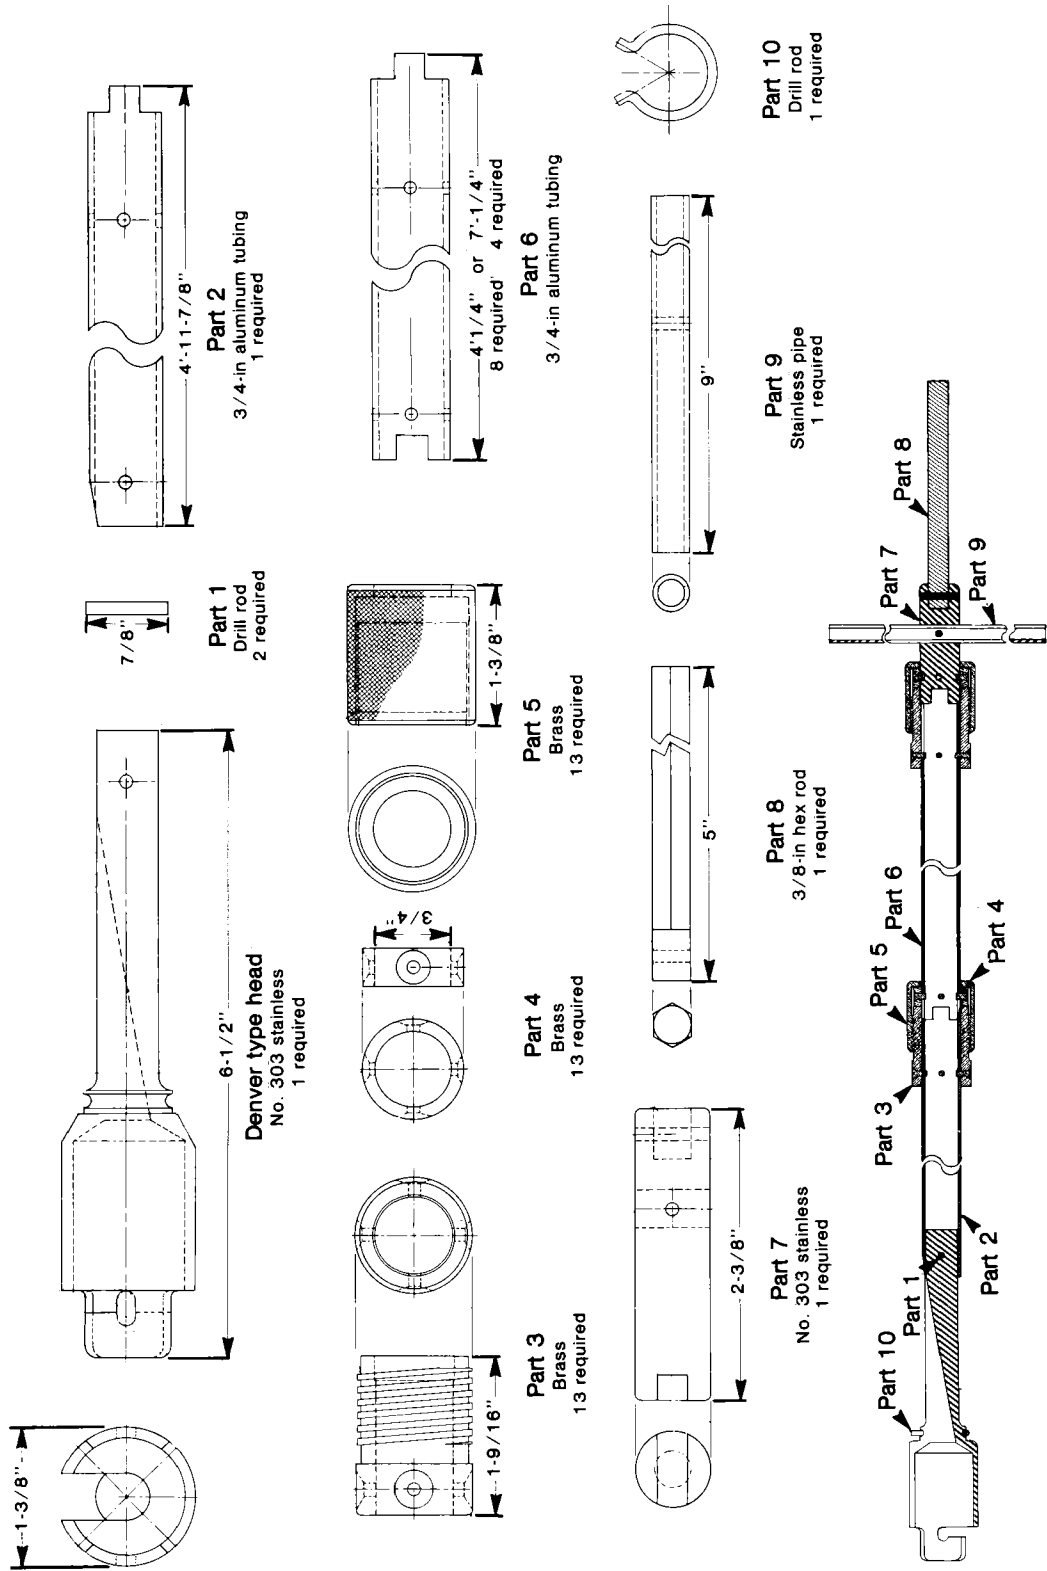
Borehole gauge placing and retrieving tool.
